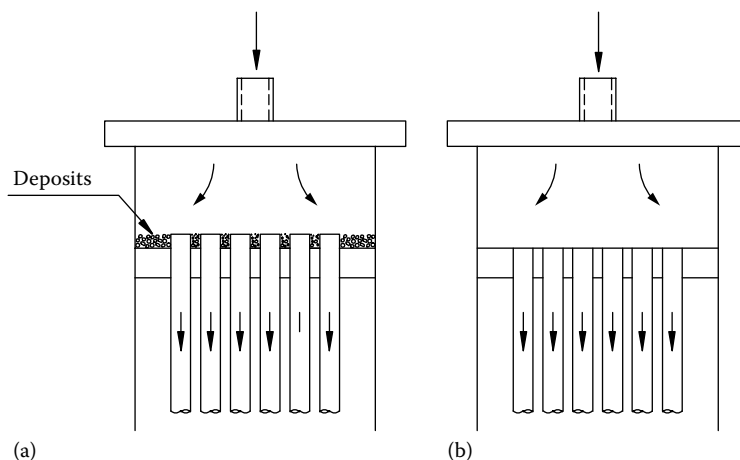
Projection of tubes beyond the tubesheet. (a) Original design with protrusion of tubes and hence prone for accumulation of deposits and (b) absence of crevices due to flush tube-to-tubesheet joint.
